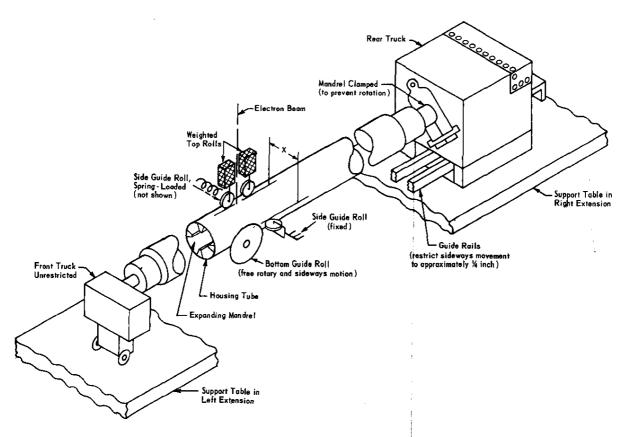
TUBE GUIDANCE SYSTEM FOR ELECTRON BEAM WELDER
